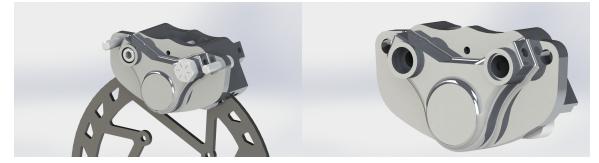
High-Mount Inboard Caliper-Rotor Figure 6: High-Mount Inboard Caliper
